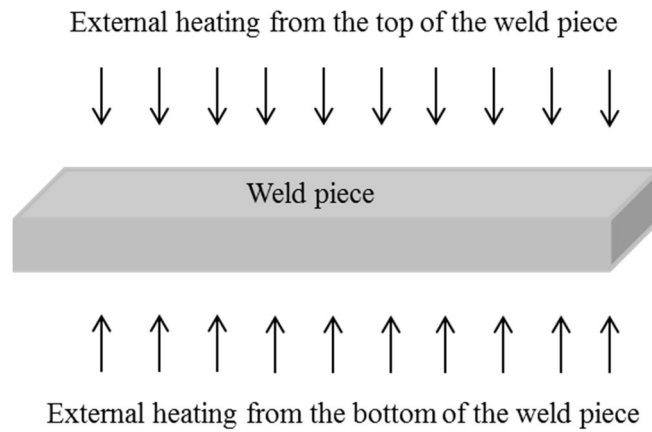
Concept of external heating from bottom and top of the weld piece
